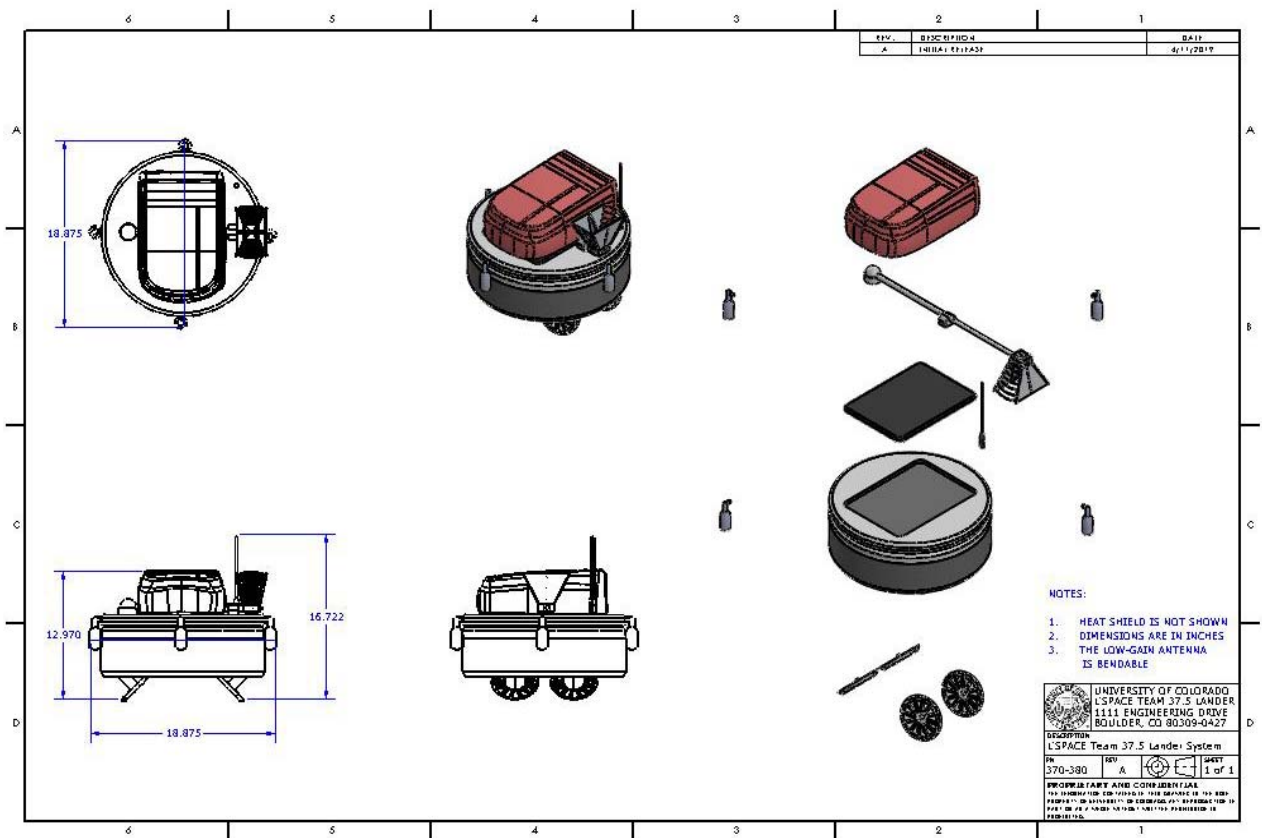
Dimensional CAD Drawing (in inches) of Entire Assembly
